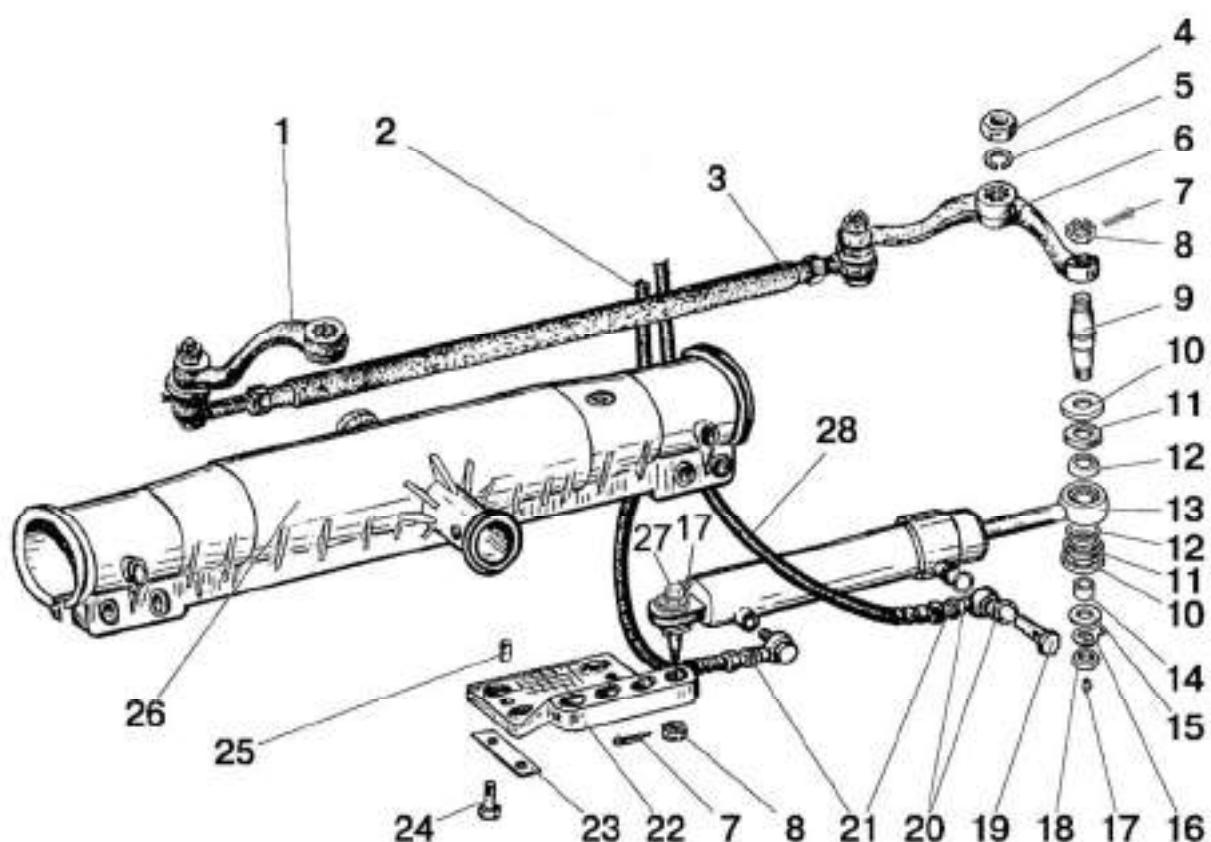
HPS hydraulic cylinder and fittings (version with front axles)
